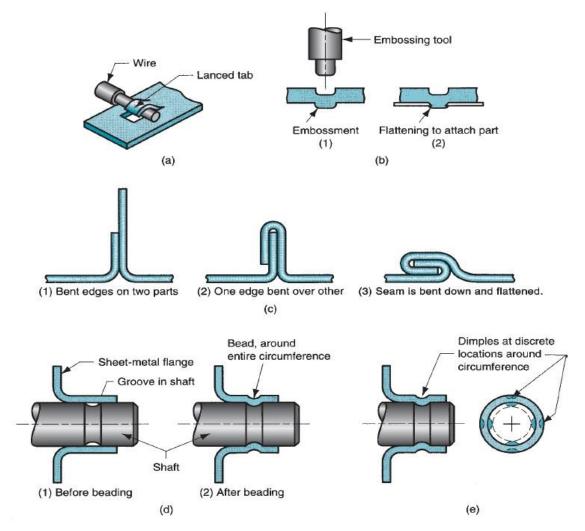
Integral fasteners: (a) lanced tabs to attach wires or shafts to sheet metal, (b) embossed protrusions, similar to riveting, (c) single-lock seaming, (d) beading, and (e) dimpling. Numbers in parentheses indicate sequence in (b), (c), and (d).
